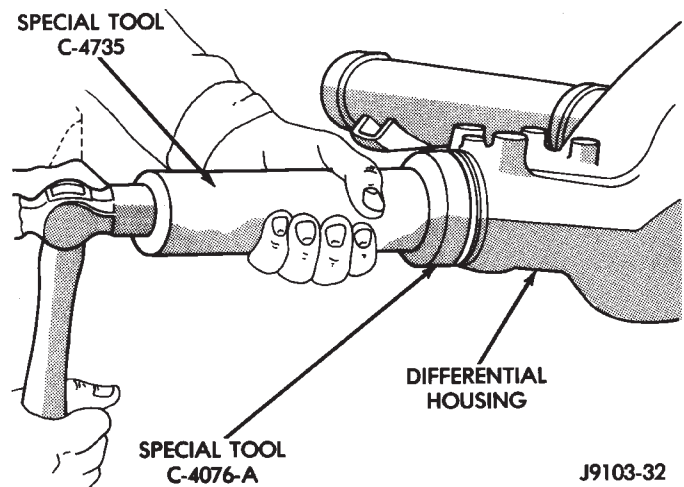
Pinion Seal Installation—8 1/4 Axle
